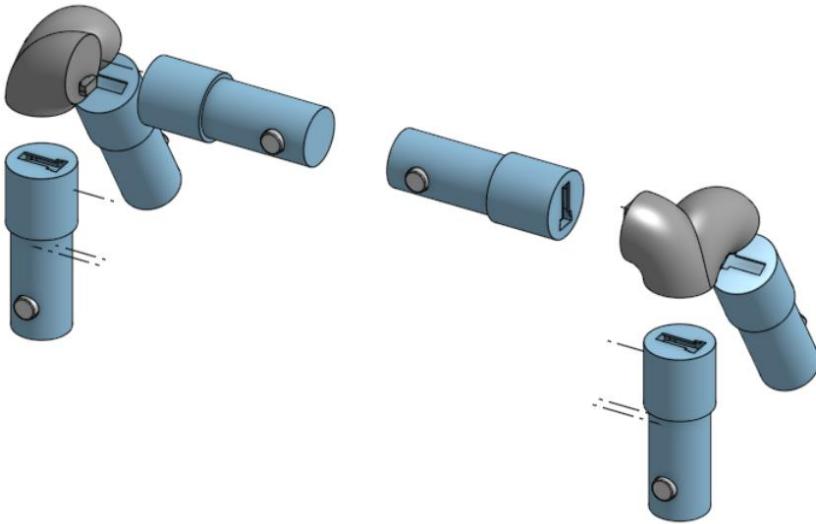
Exploded view of pipe connectors. [See assembly here.](#)
